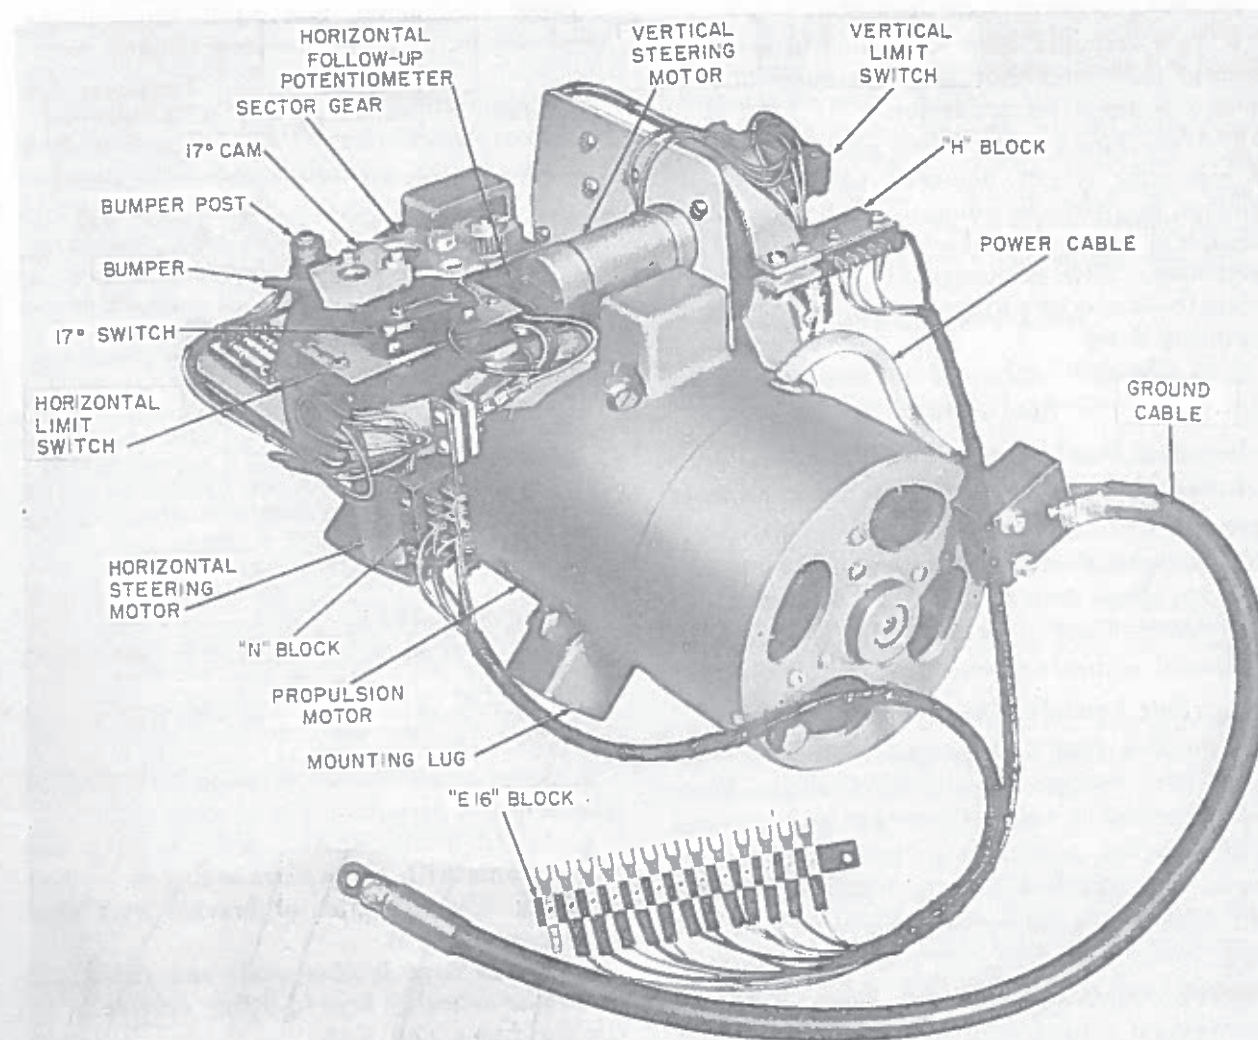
Propulsion Motor and Steering Motor Assemblies.
